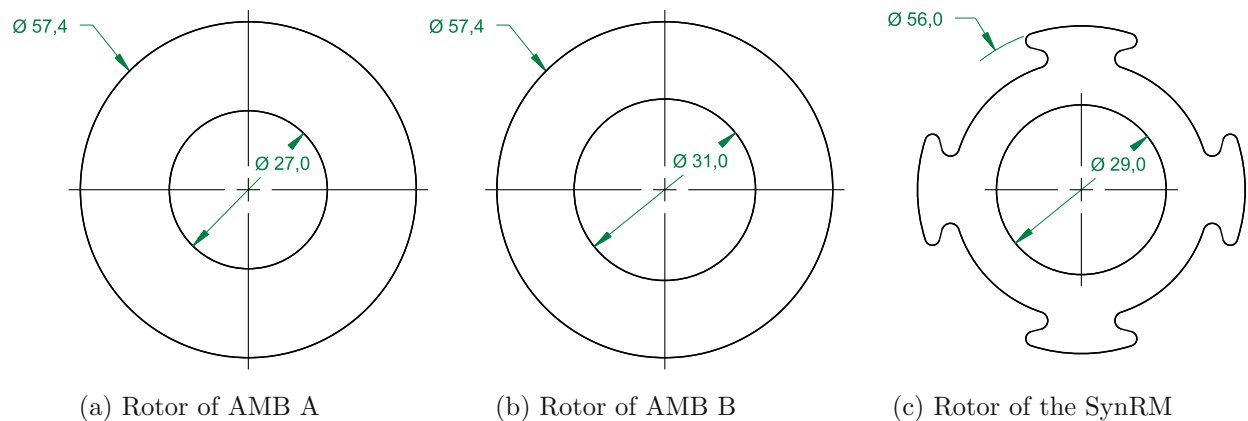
Drawings of magnetic bearing rotors and drive unit SynRM rotor - all dimensions in millimeters.
